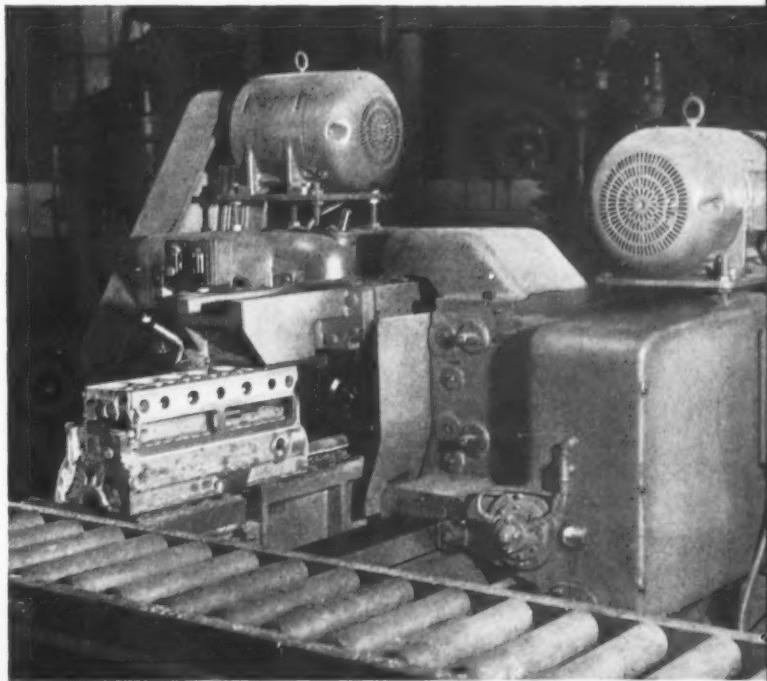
(Bottom) Double-end Machine for Milling the Long Manifold Face and Various Pads on Opposite Sides of Cylinder Blocks
